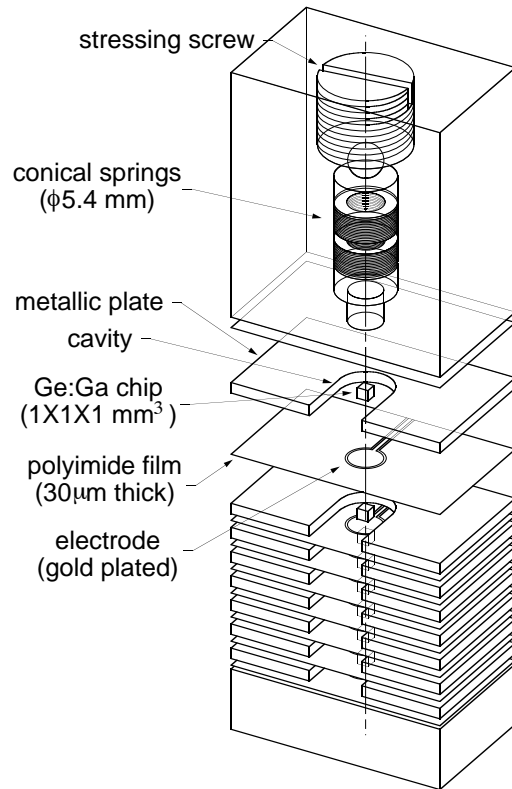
A schematic drawing of the stressing mechanism and the linear array detector
